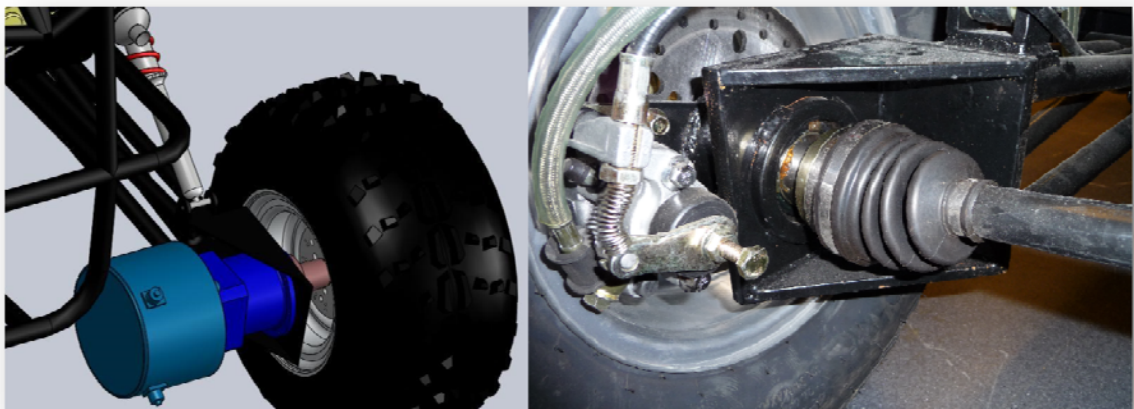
Near Wheel Design(a) vs OEM Hub Assembly(b)
